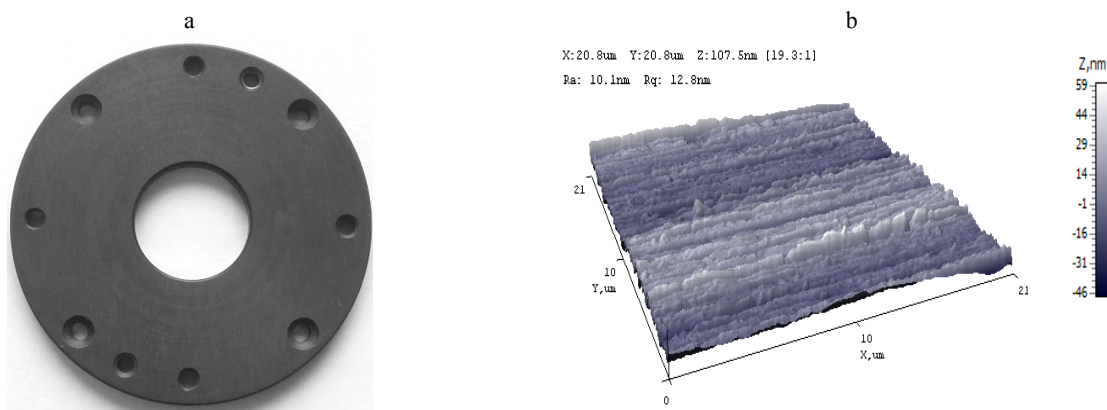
Sample with machined surface of MAT-coating (a) and topography of this surface (b)
